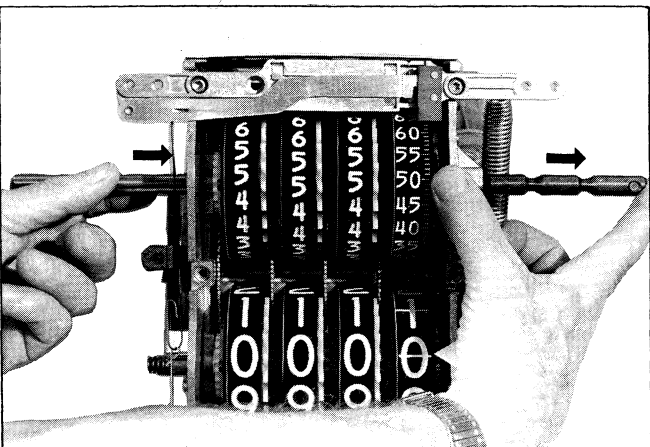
Pushing wheel shaft out of computer with long dummy shaft.
